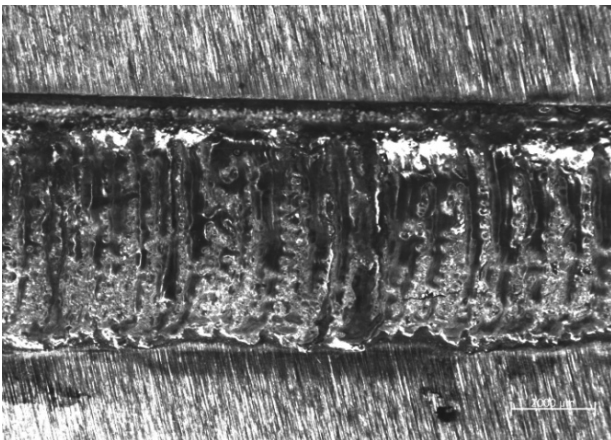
Part shape of bead face of the high speed steel HS6-5-2-5 surface alloyed with the Al_2O_3 , laser power 1.7 kW
